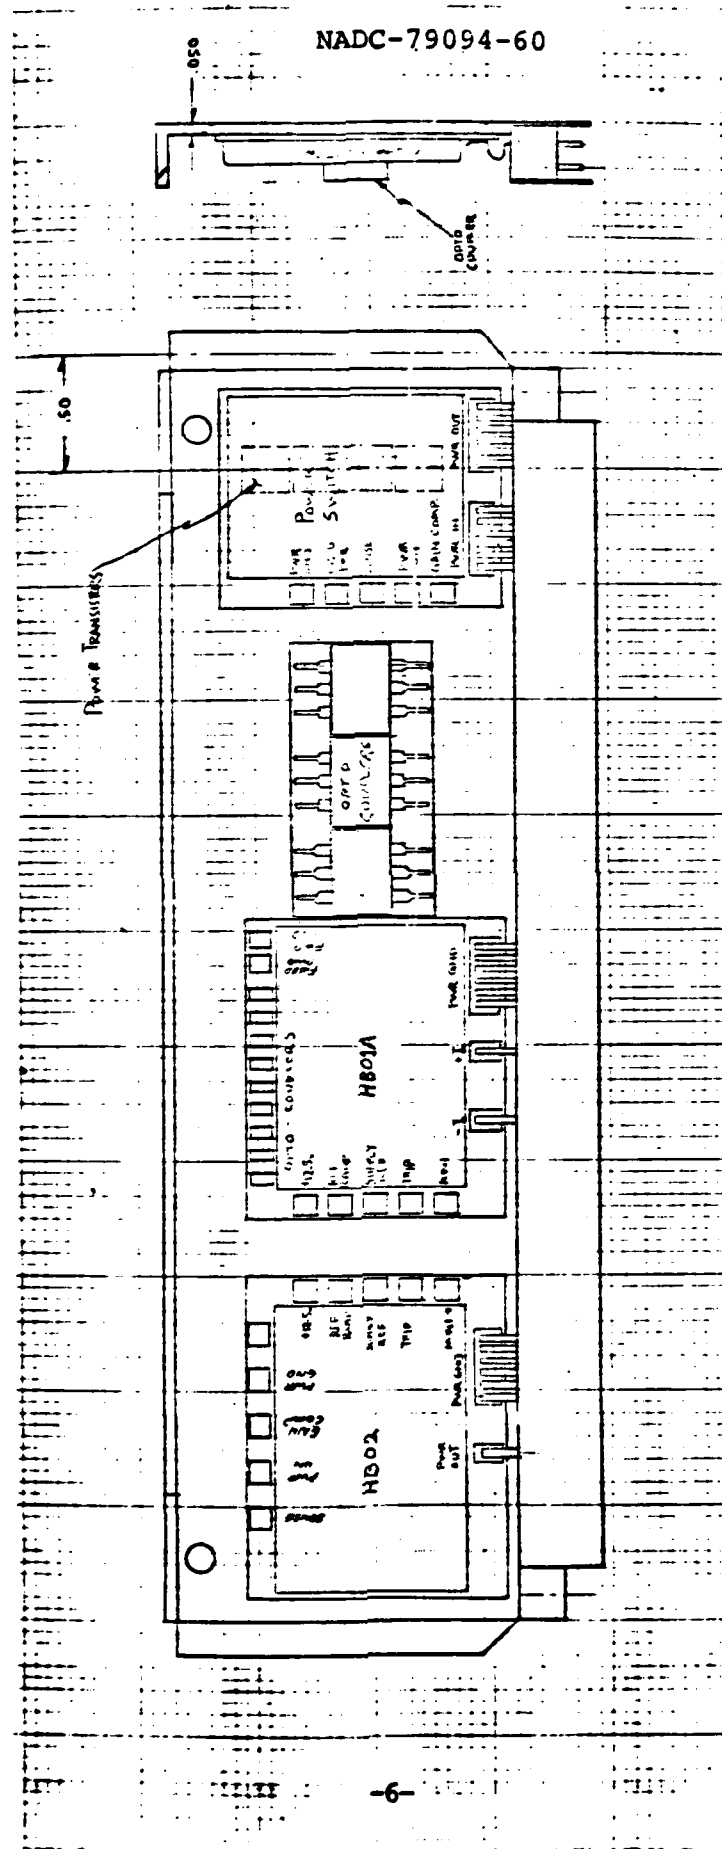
MOUNTING TECHNOLOGY ON OFF-SET FRAME.
